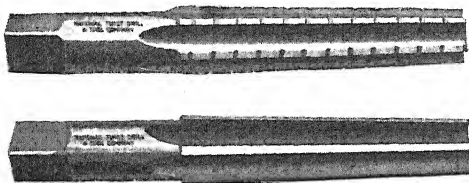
Roughing and Finishing Reamers for Finishing Morse Taper Sockets.
